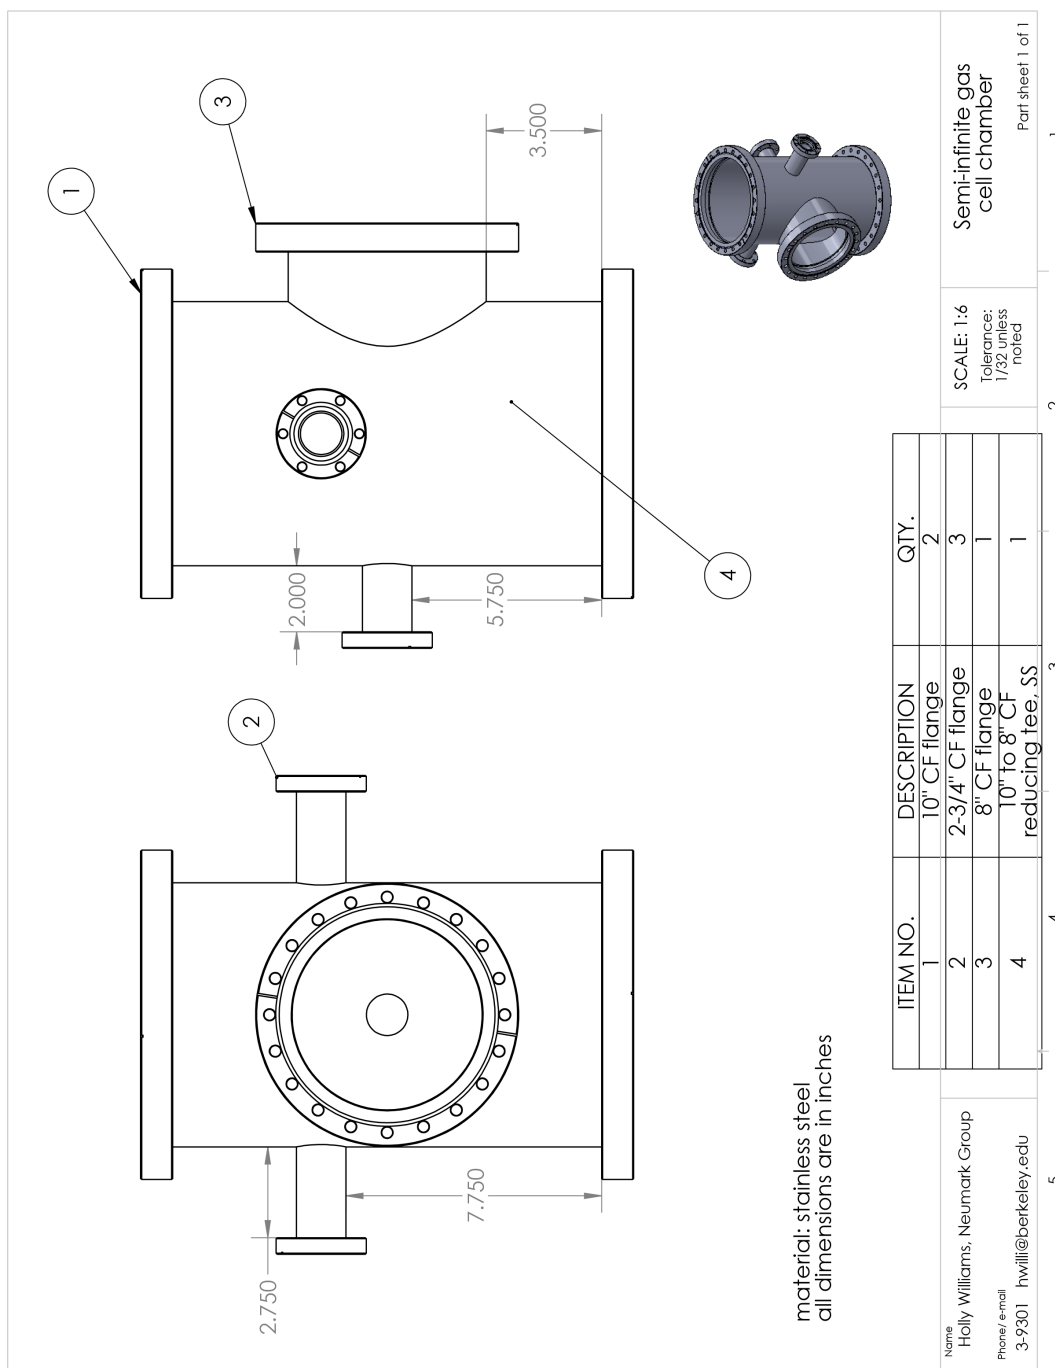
SIGC vacuum chamber machine drawing. The 10" to 8" CF reducing tee was purchased with flanges, and the 2-3/4" CG half nipples were installed by the College of Chemistry machine shop. The bottom 10" CF flange is rotatable; all other flanges are fixed. All components are made from stainless steel (304 SS).
